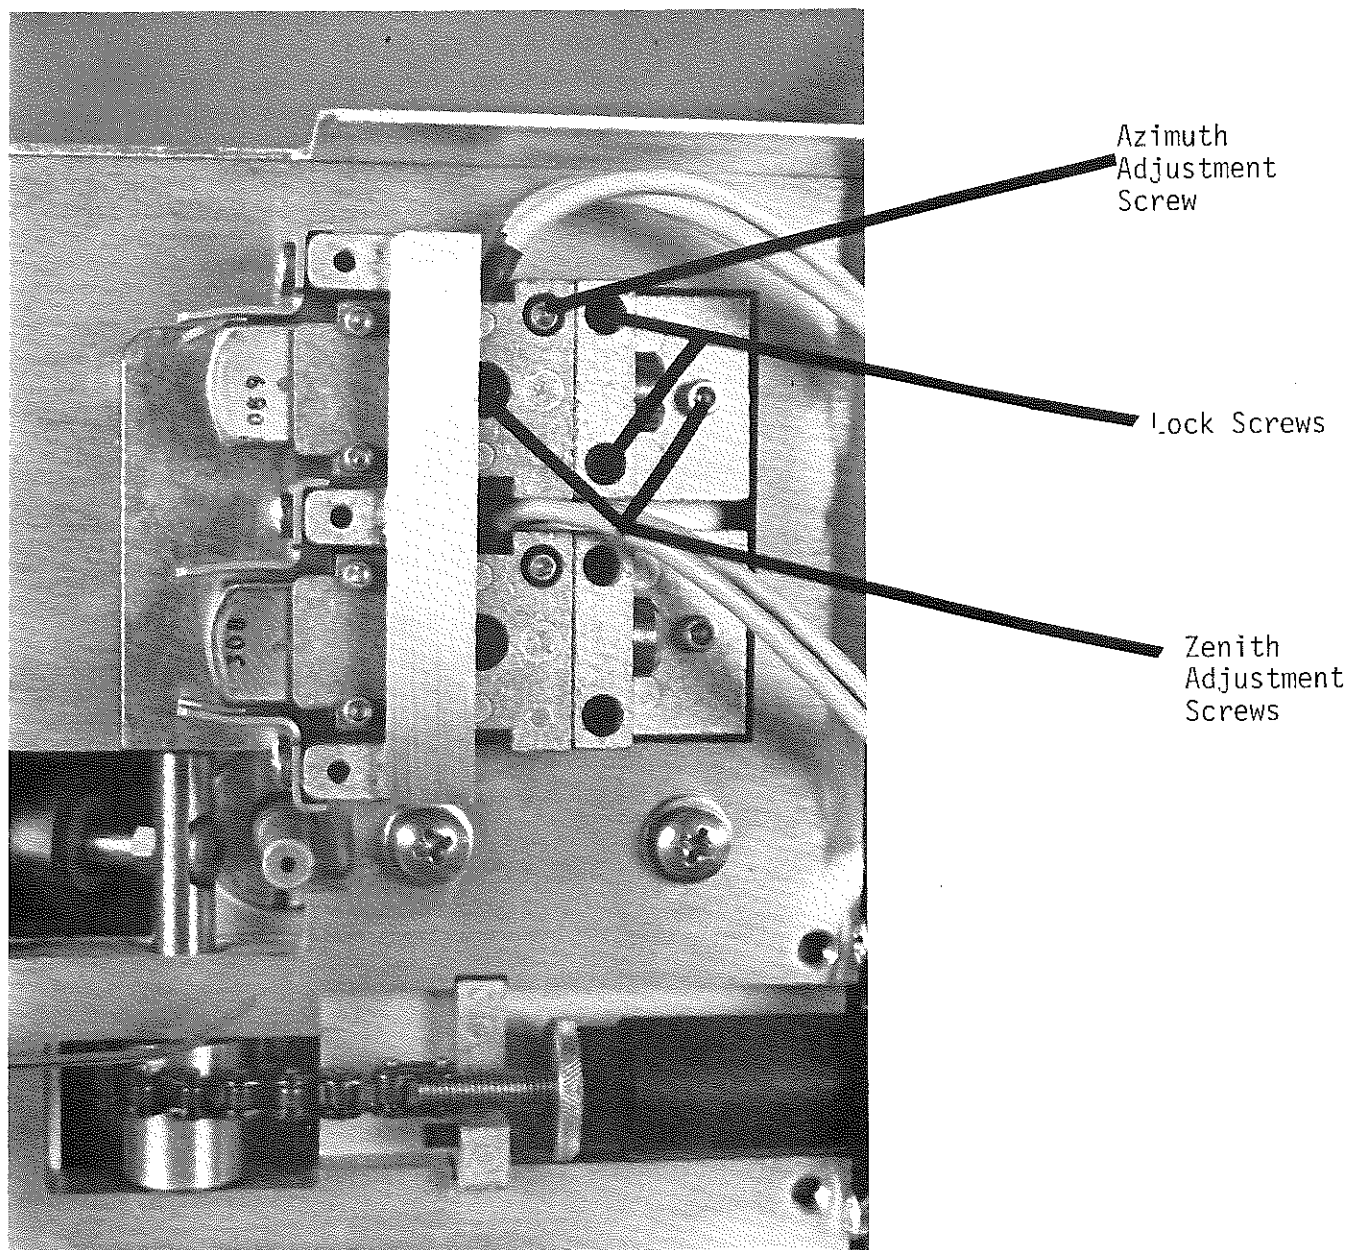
HEAD ADJUSTMENT SCREW LOCATION
